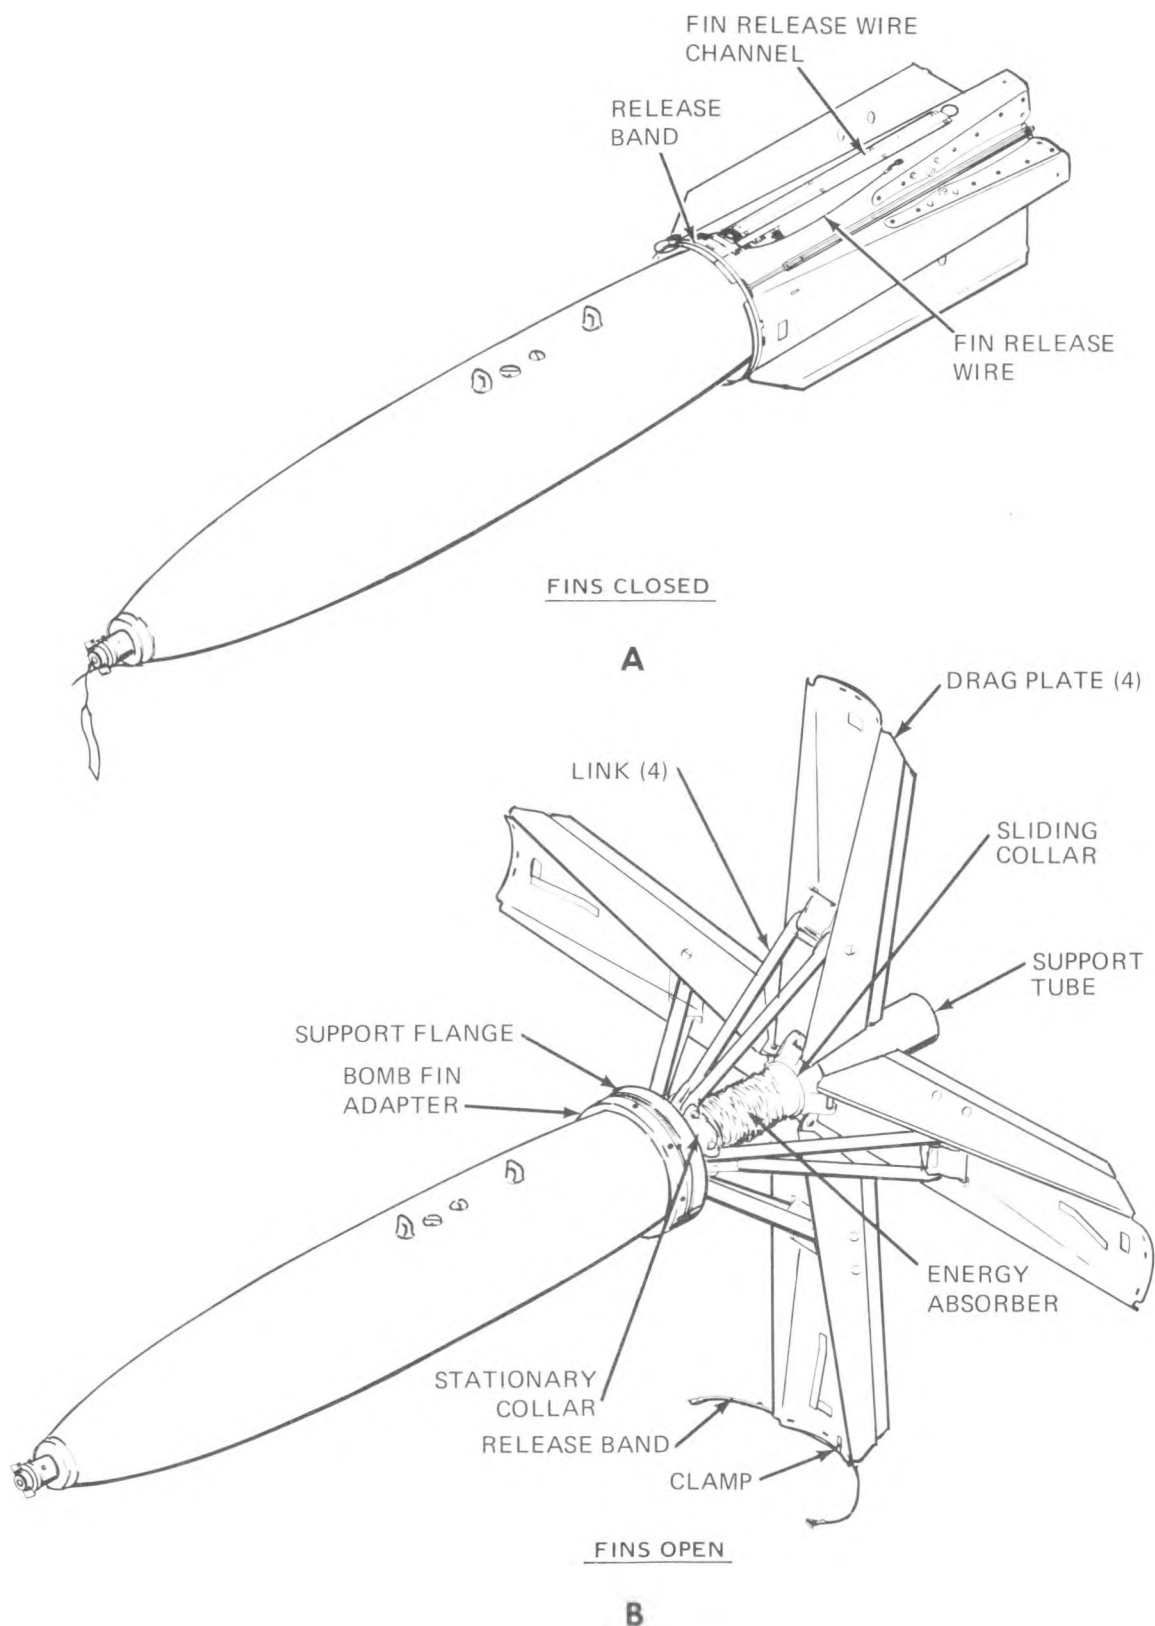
Fin MAU-91 With Adapter ADU-320/B on Bomb Body MK 83
